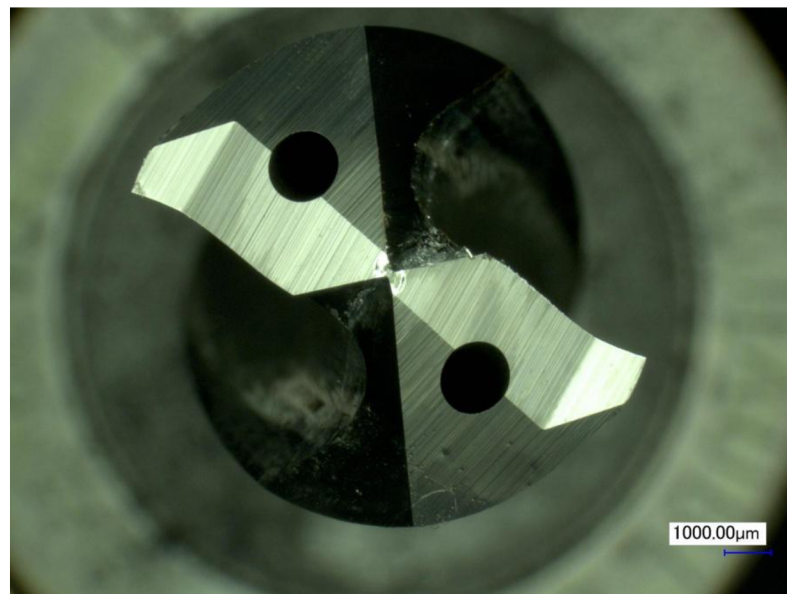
Exemplary photo by KEYENCE after have drilled 4 holes with oil A
